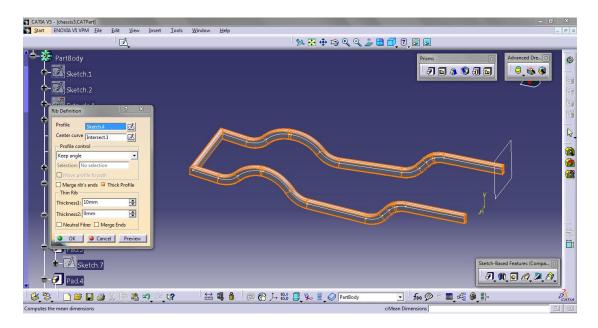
Used Rib Tool For The Side Rails In Chassis
